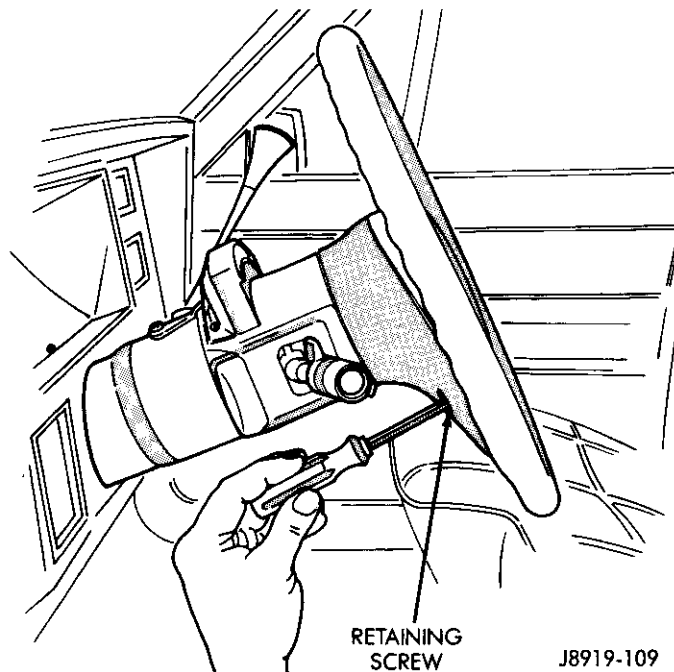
Standard Steering Wheel Cover Removal/Installation
